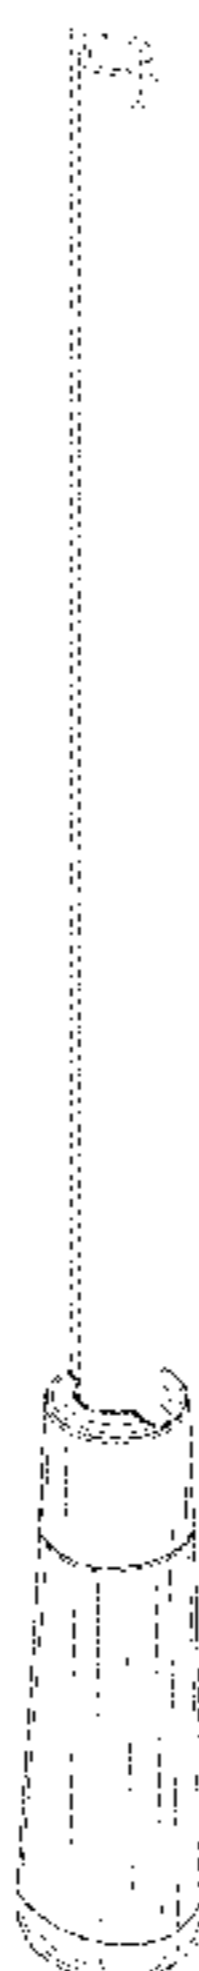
is a left side elevational view of the wand assembly of FIG. 8;
